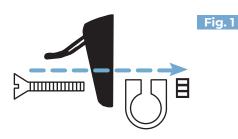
Remove the screw bolt from the tube clamp and assemble the fixlock buckle on the tube clamp according to the example. Use the supplied rubber strip for extra grip on the wheelchair frame.
